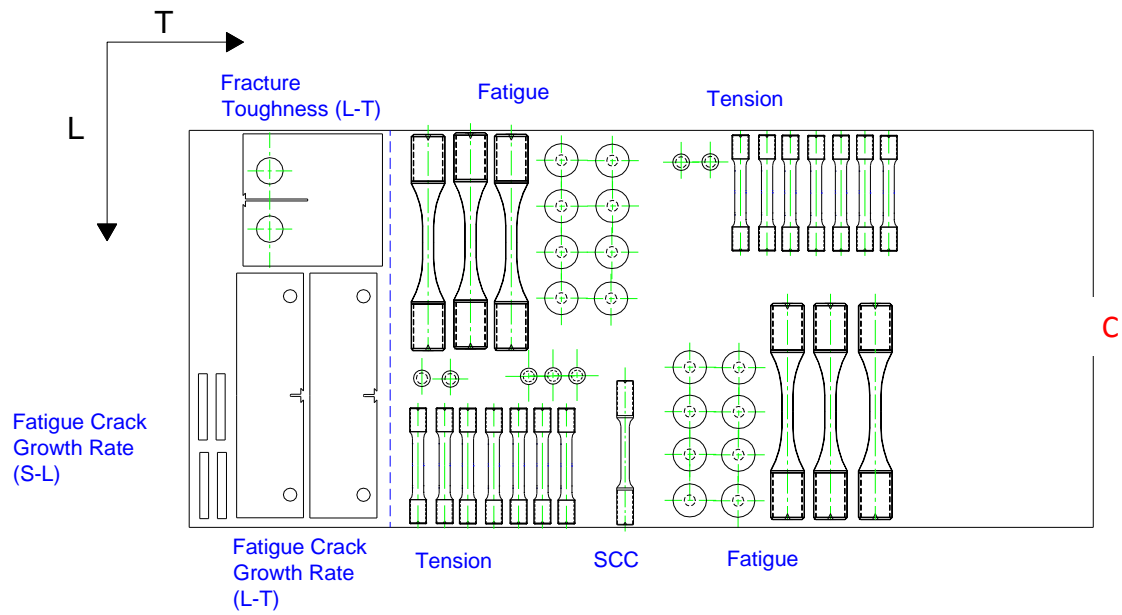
Ti-6Al-4V billet (#K27P) indicating dimensions, orientations, and sectioning plan prior to specimen extraction.
